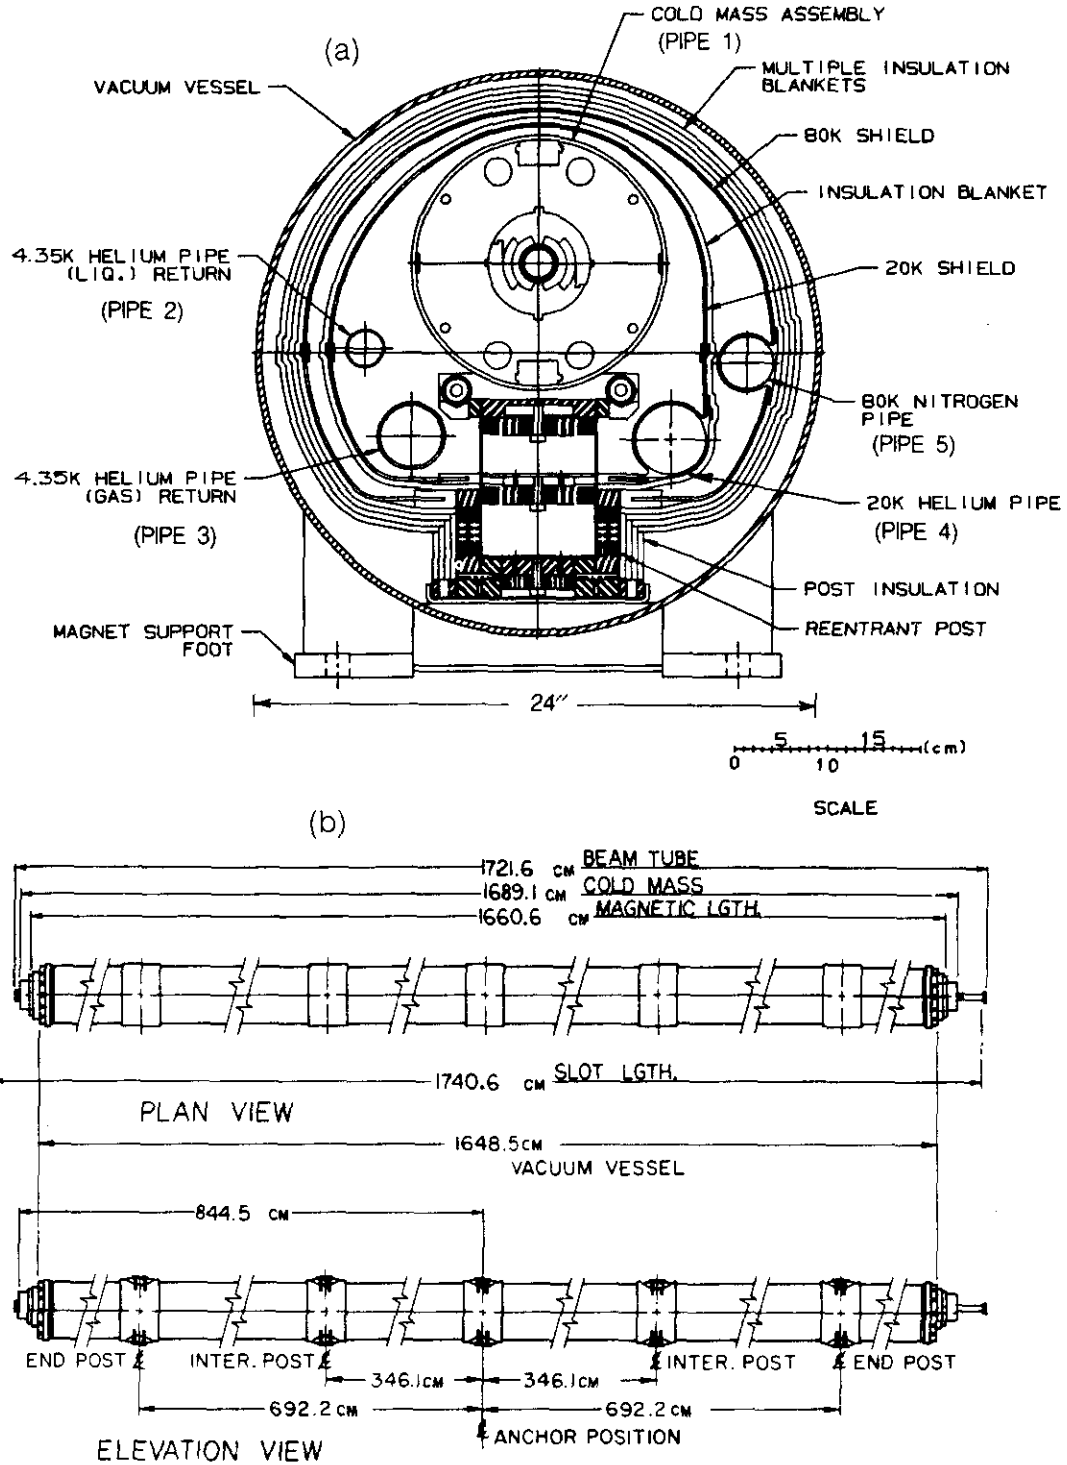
(a) Dipole cryostat cross section. The vacuum-vessel support-foot arrangement shown here is that used in prototype units. The arrangement of the conceptual design is shown schematically in Fig. 5.2-22(a). (b) Longitudinal sections of dipole cryostat, indicating support points and associated parameters.
